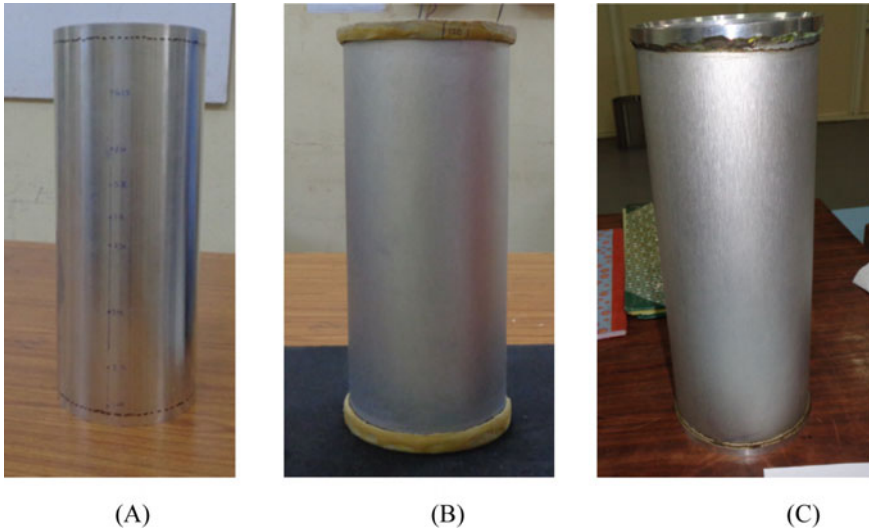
Various stages of chemical milling process a before milling, b during milling, c after milling and removal of masking agent
